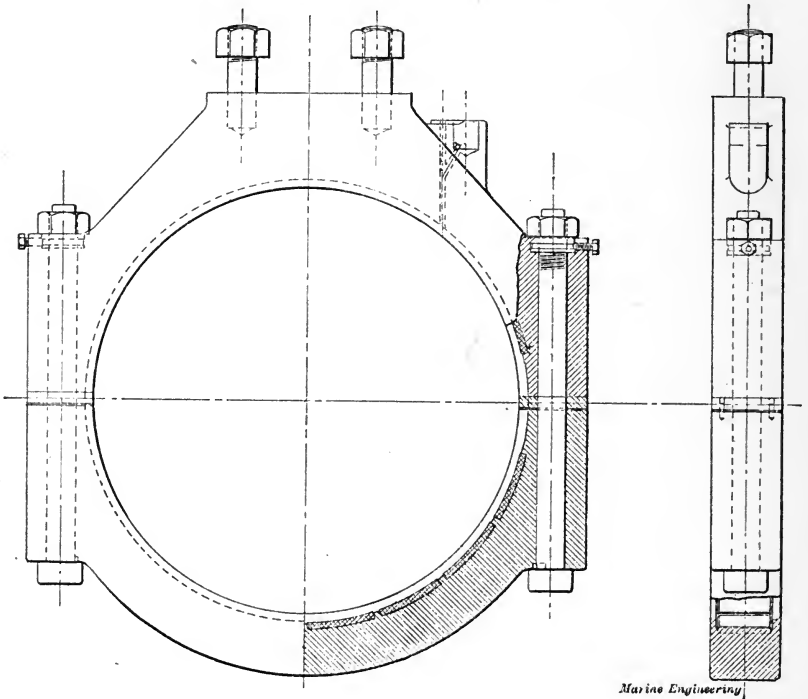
Excentric Strap, Detail of Construction and Fitting.
